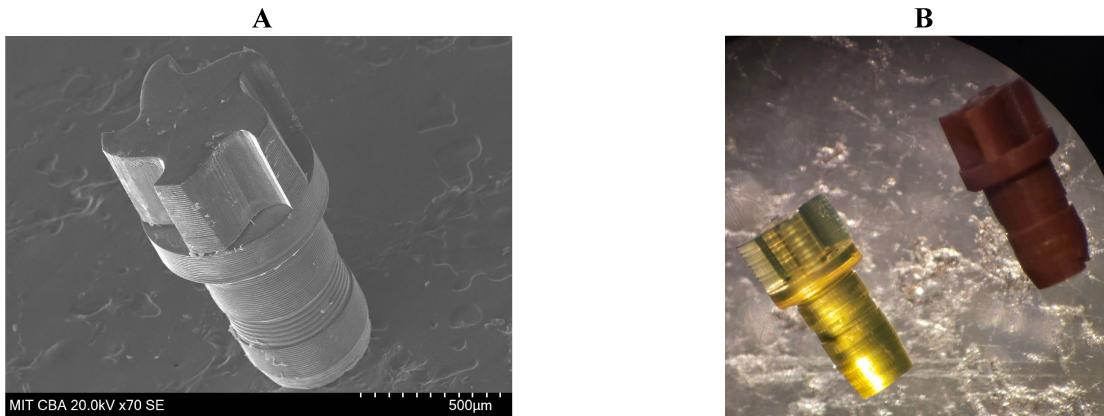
Rotor-closure and gas-drive prototypes. (A) Two-part diamond drive-tip prototype fabricated by Zach Fredin, showing turbine-fin geometry, central post, and laser-machined surface texture; the machining marks and assembled construction motivate improved finishing and single-piece diamond closure fabrication. (B) Micro-printed drive-tip and impeller-style prototypes developed with Nick Wiesner and Samuel Strymis for sub-millimeter rotor closure development; additive microfabrication can generate turbine-like features for rapid iteration, but final use still depends on balance, cap fit, NMR background, thermal expansion, and spin survivability.
